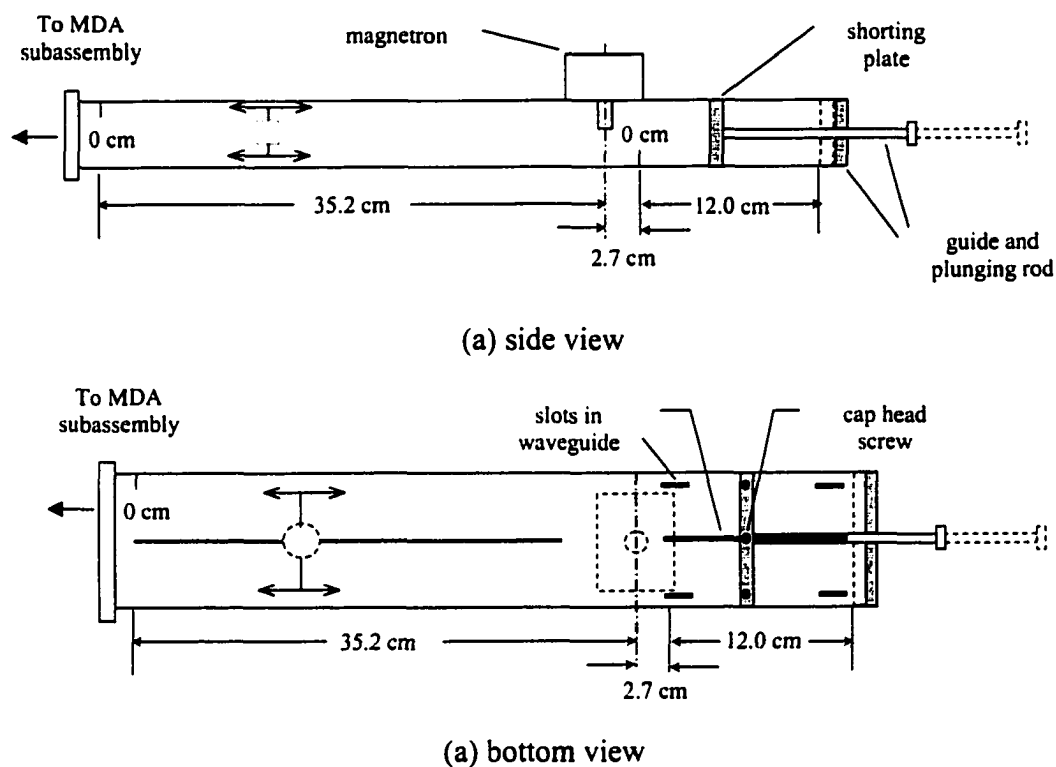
Shorting Plate Adjustment Scheme.
